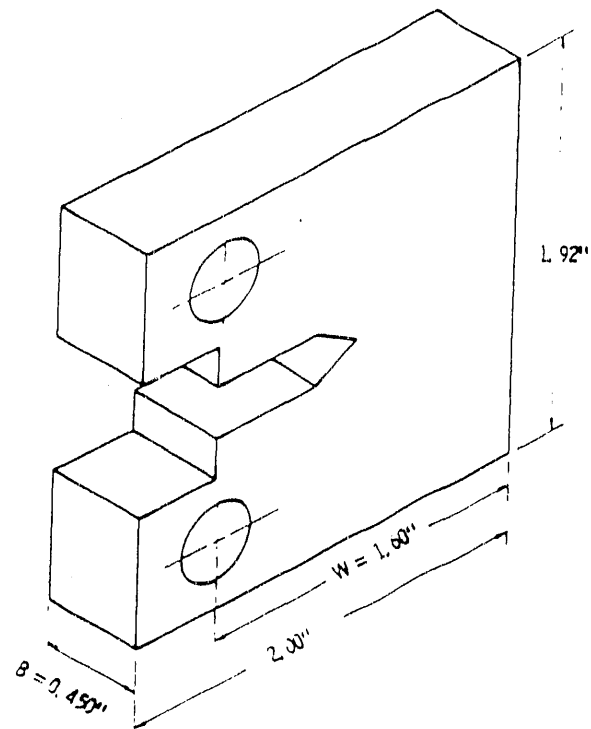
0.8T-CT Specimen Dimensions (inches). The specimens were not sidegrooved [4].
